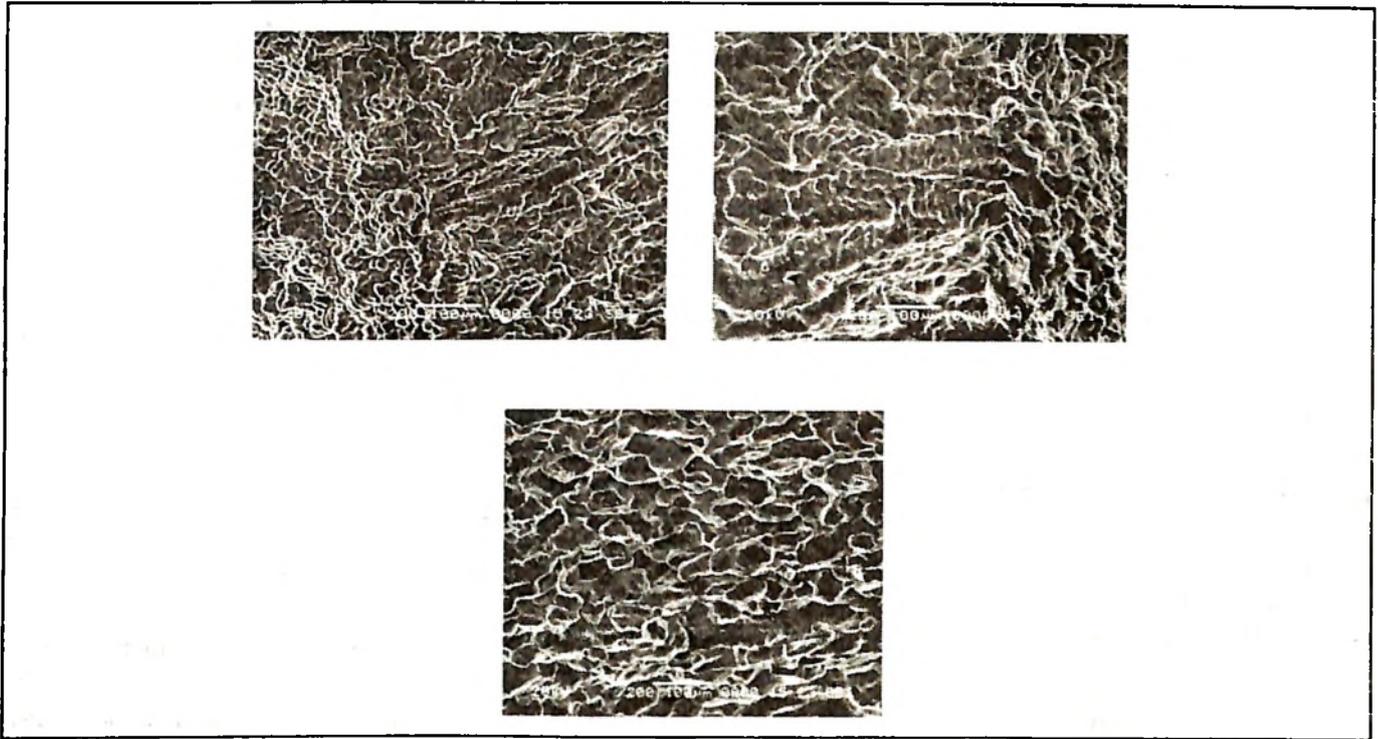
Fracture features of HAZ cracks of AA6061 alloy welds made with AA5356 filler, (a) near fusion boundary, (b) middle of the crack, (c) near the end of crack.
